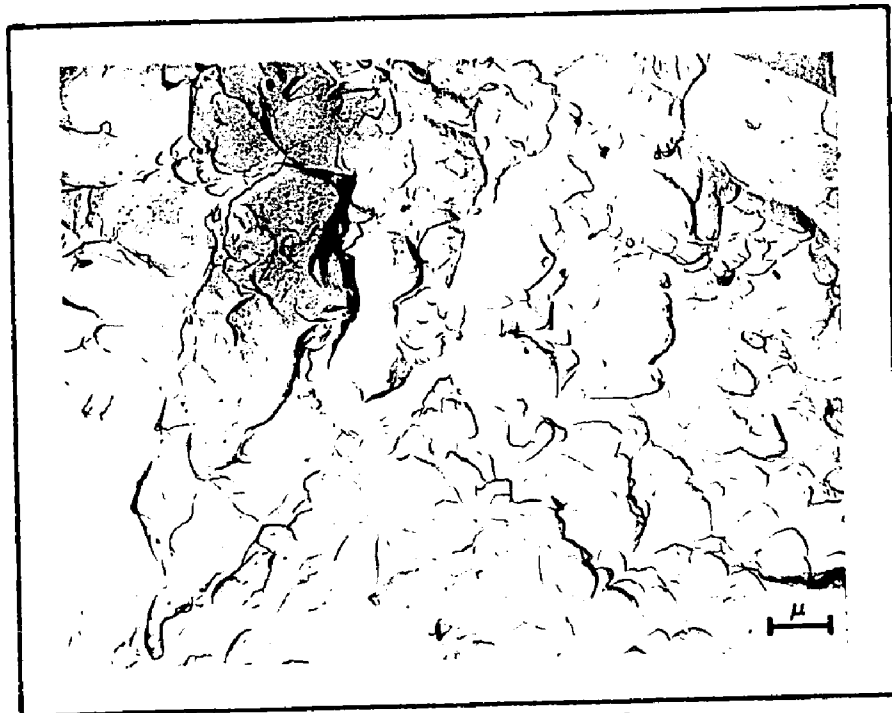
Electron fractographs of fractured Charpy specimens. 5% Ni GMA and GTA welds.
